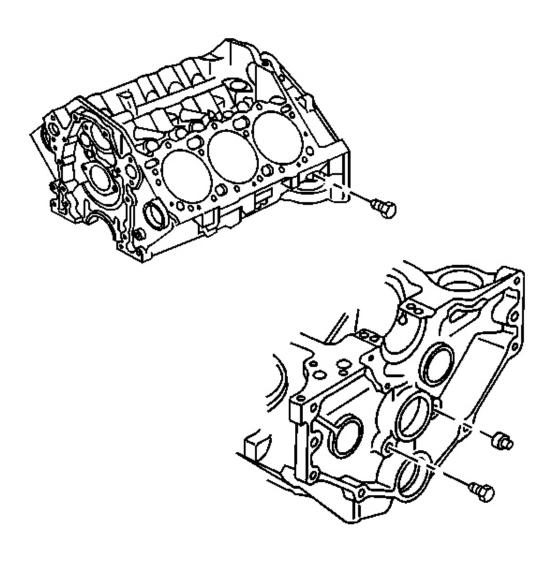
Engine Block Oil Gallery Plugs Courtesy of GENERAL MOTORS CORP.
